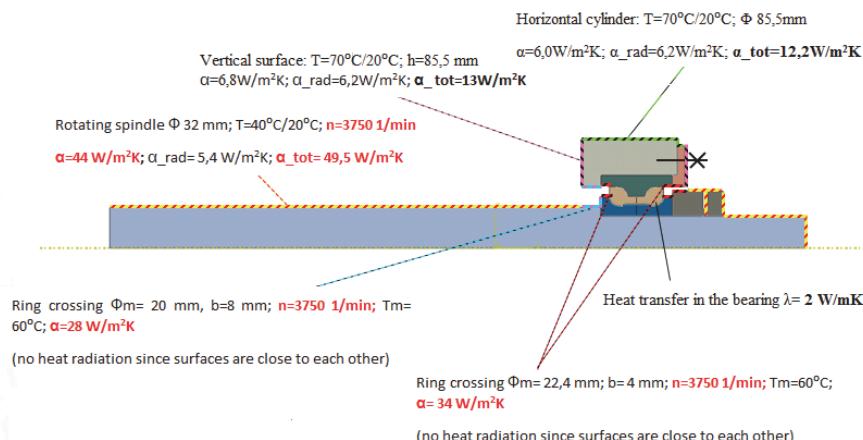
Heat transfer coefficients of the reference surfaces in the bearing assembly
